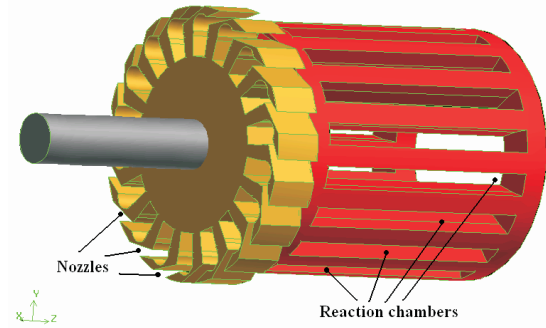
Detailed view of the ring engine rotor containing a set of reaction chambers and nozzles generating torque
